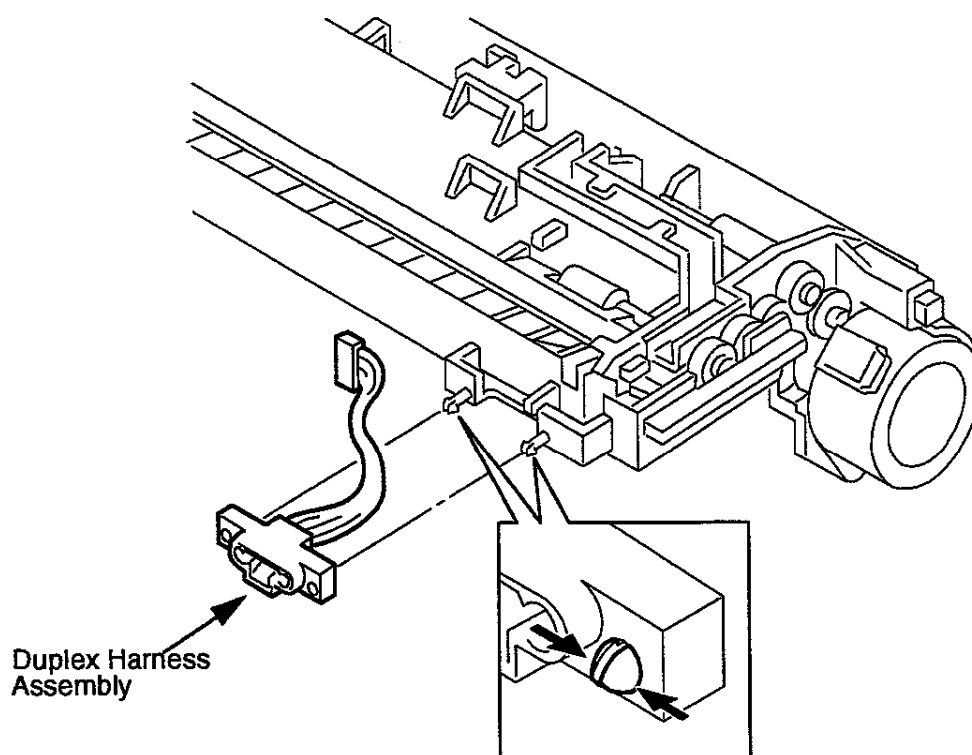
Removing the Duplex Harness Assembly
